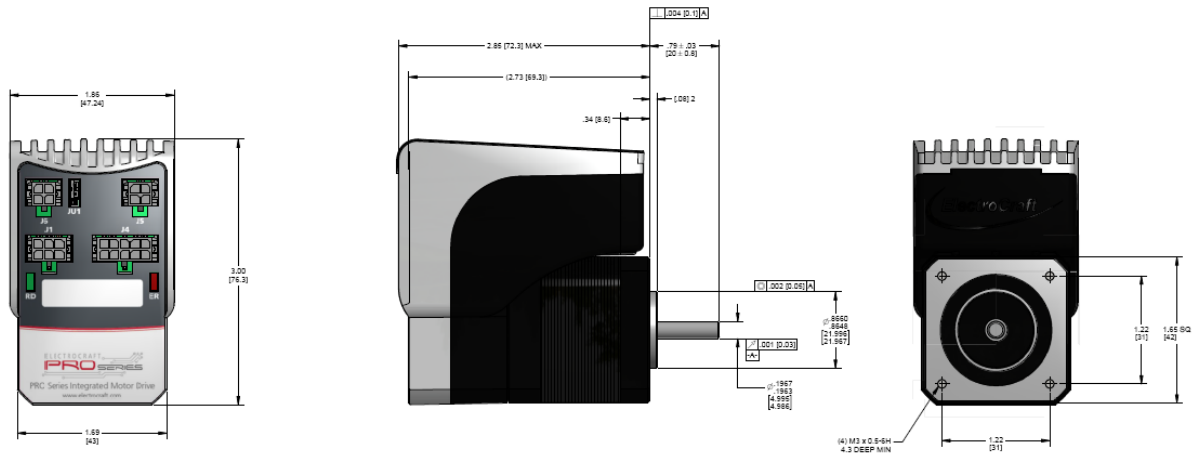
PT42-A44V48A-0-D-CAN mechanical dimensions.
